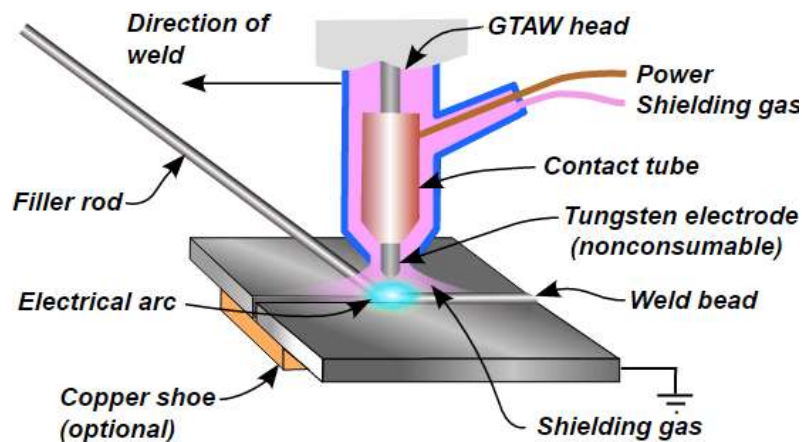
Schematic representation of the TIG welding method [10]
